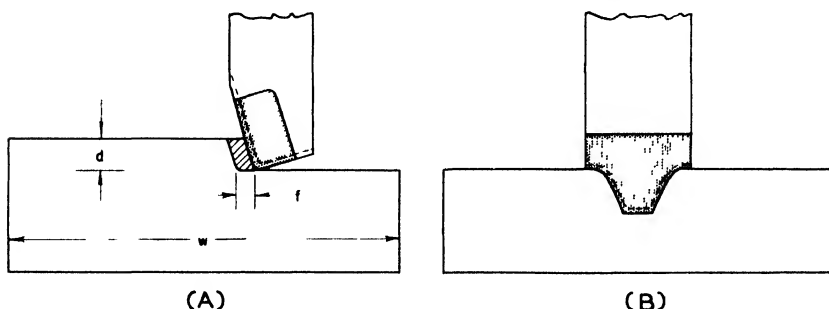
Machining with Single-Point Tools in the Planer or Shaper, Taking a Plain Straight Cut (A) and a Formed Cut (B)
